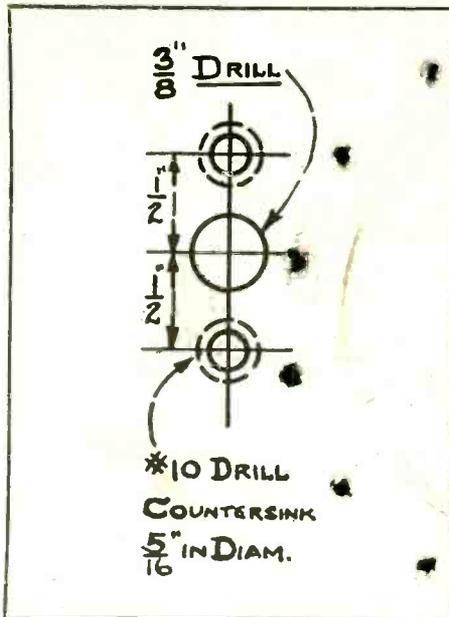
template for drilling holes in the panel for mounting the special variable condenser used in the Superdyne. The center hole is for the condenser shaft and should afford free clearance. The two other holes are for the mounting screws.
